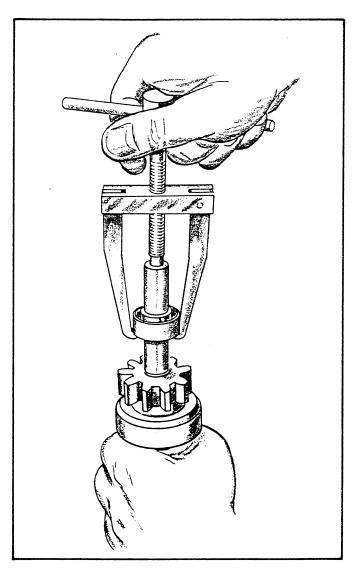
MOUNTING OVERRUNNING CLUTCH
